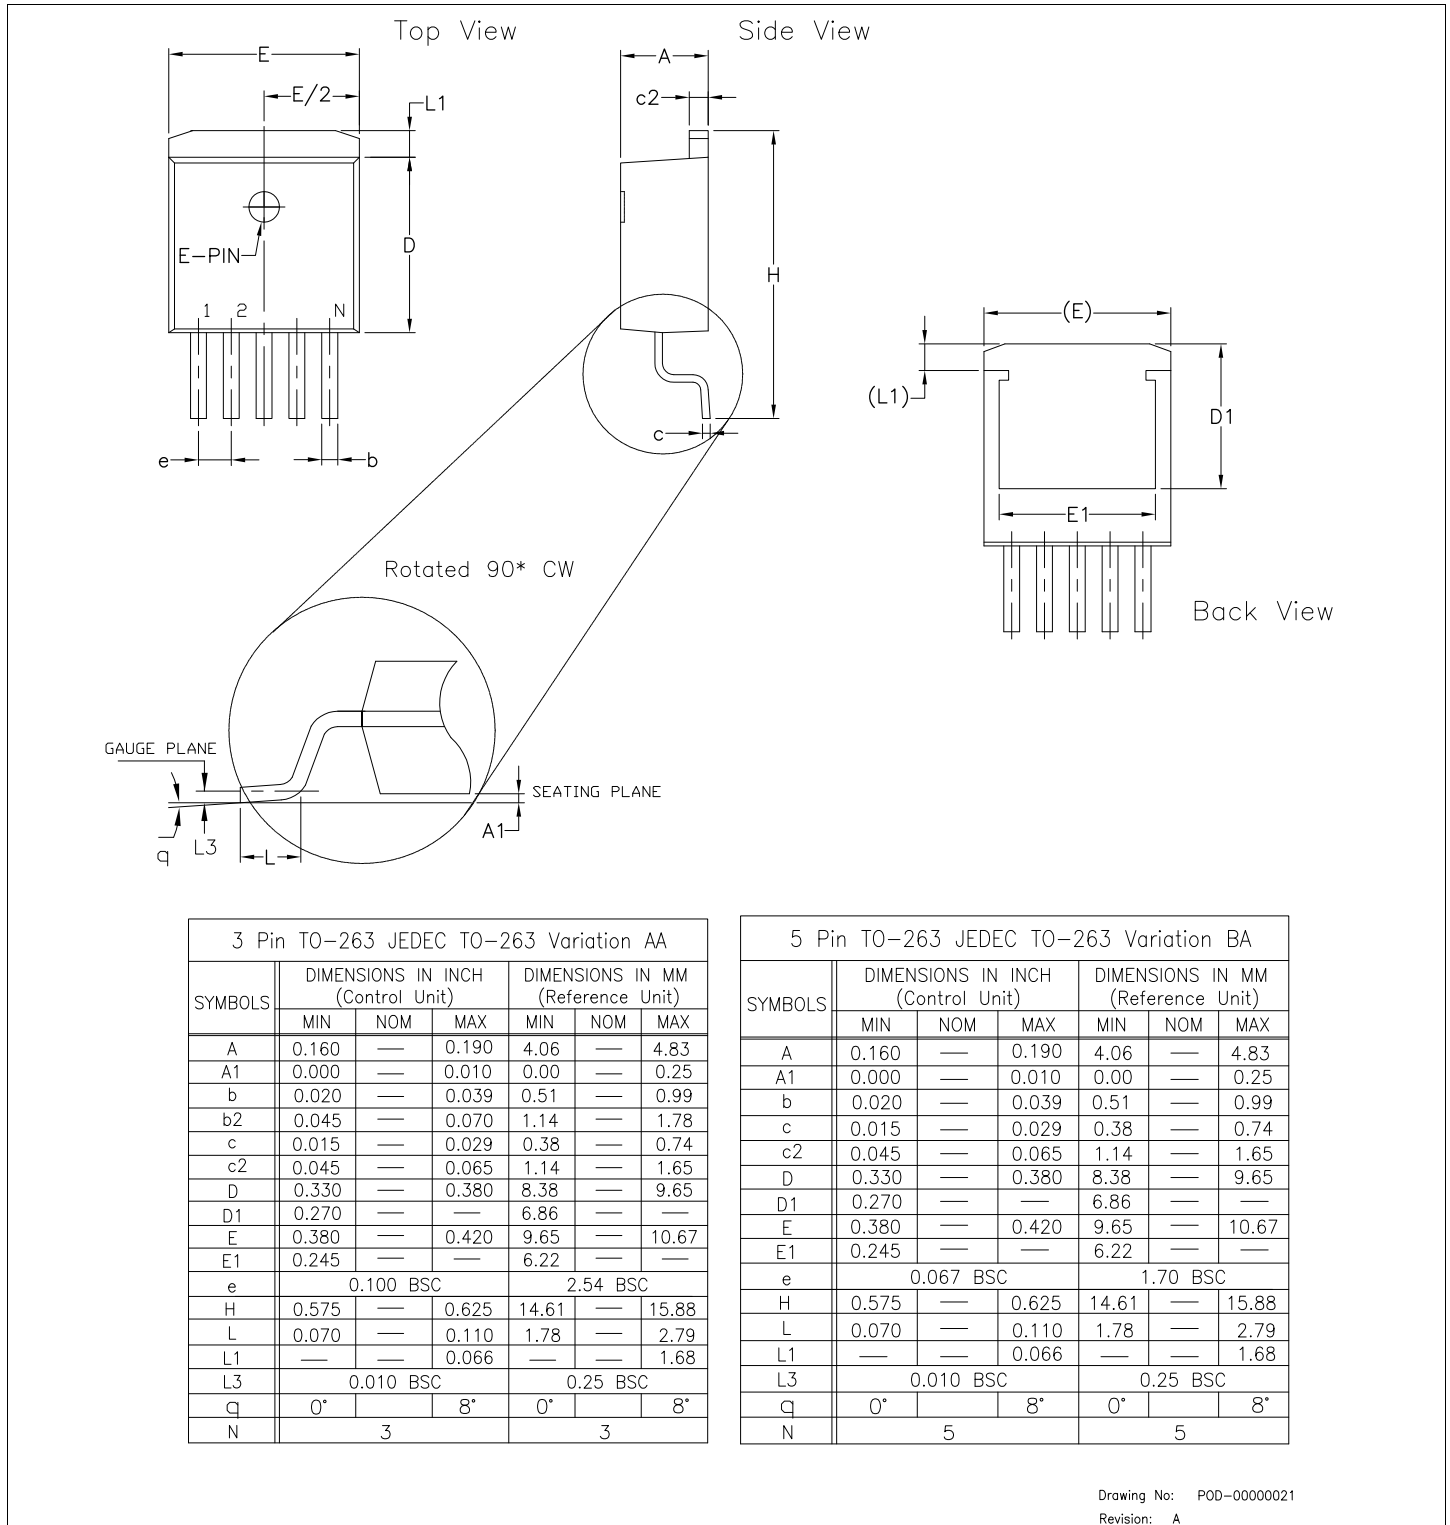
SPX2815 Mechanical Dimensions—3-Pin TO-263
